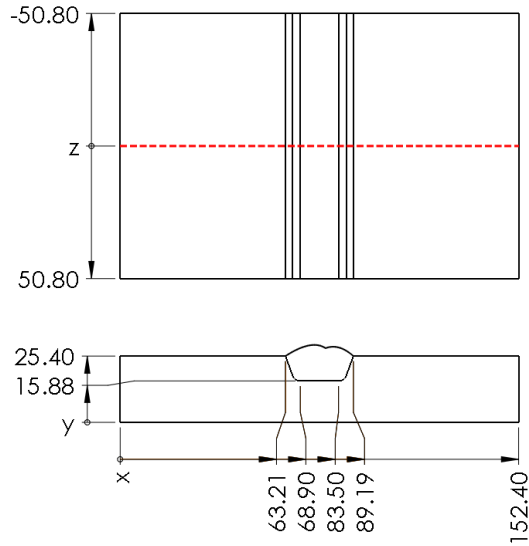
Titanium electron beam welded plate dimensions and measurement location (dimensions in mm)
